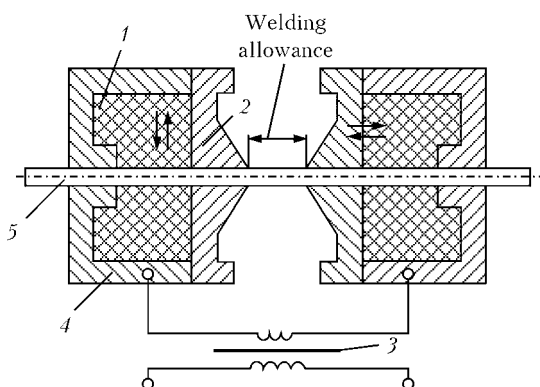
Flow diagram of the continuous flash butt welding process: 1 – heat-insulating insert; 2 – forming knives; 3 – welding transformer; 4 – current conductor; 5 – workpiece
